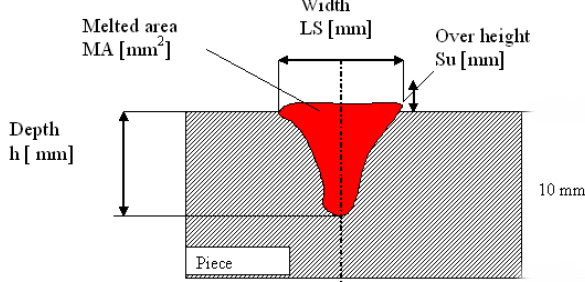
Scheme of weld cross-section with the measured sizes.
